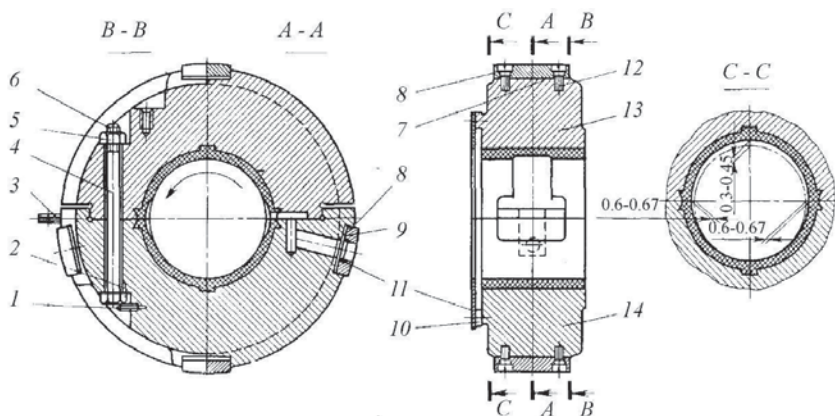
Liner of the thrust bearing of the Power Machines (LMZ):
